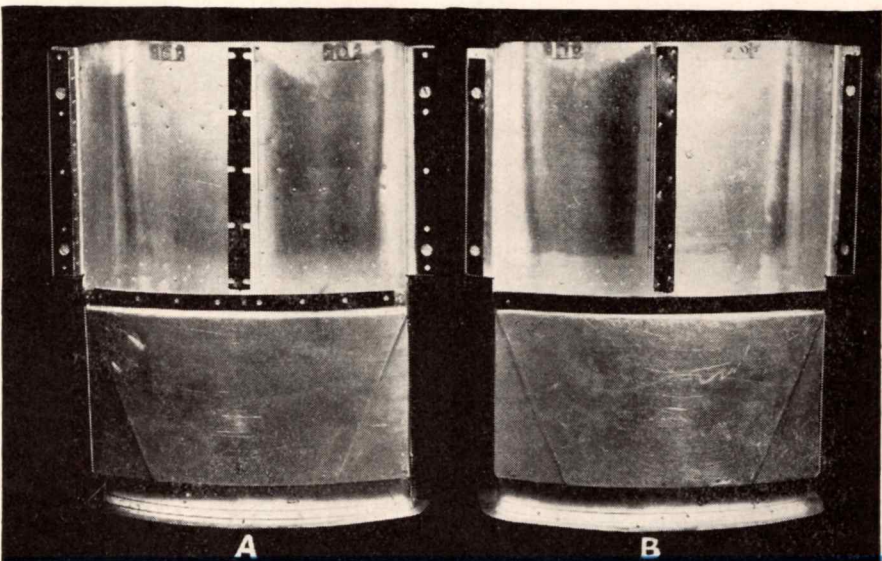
(A) Metal-back chafing strips; (B) riveted and cemented strips
